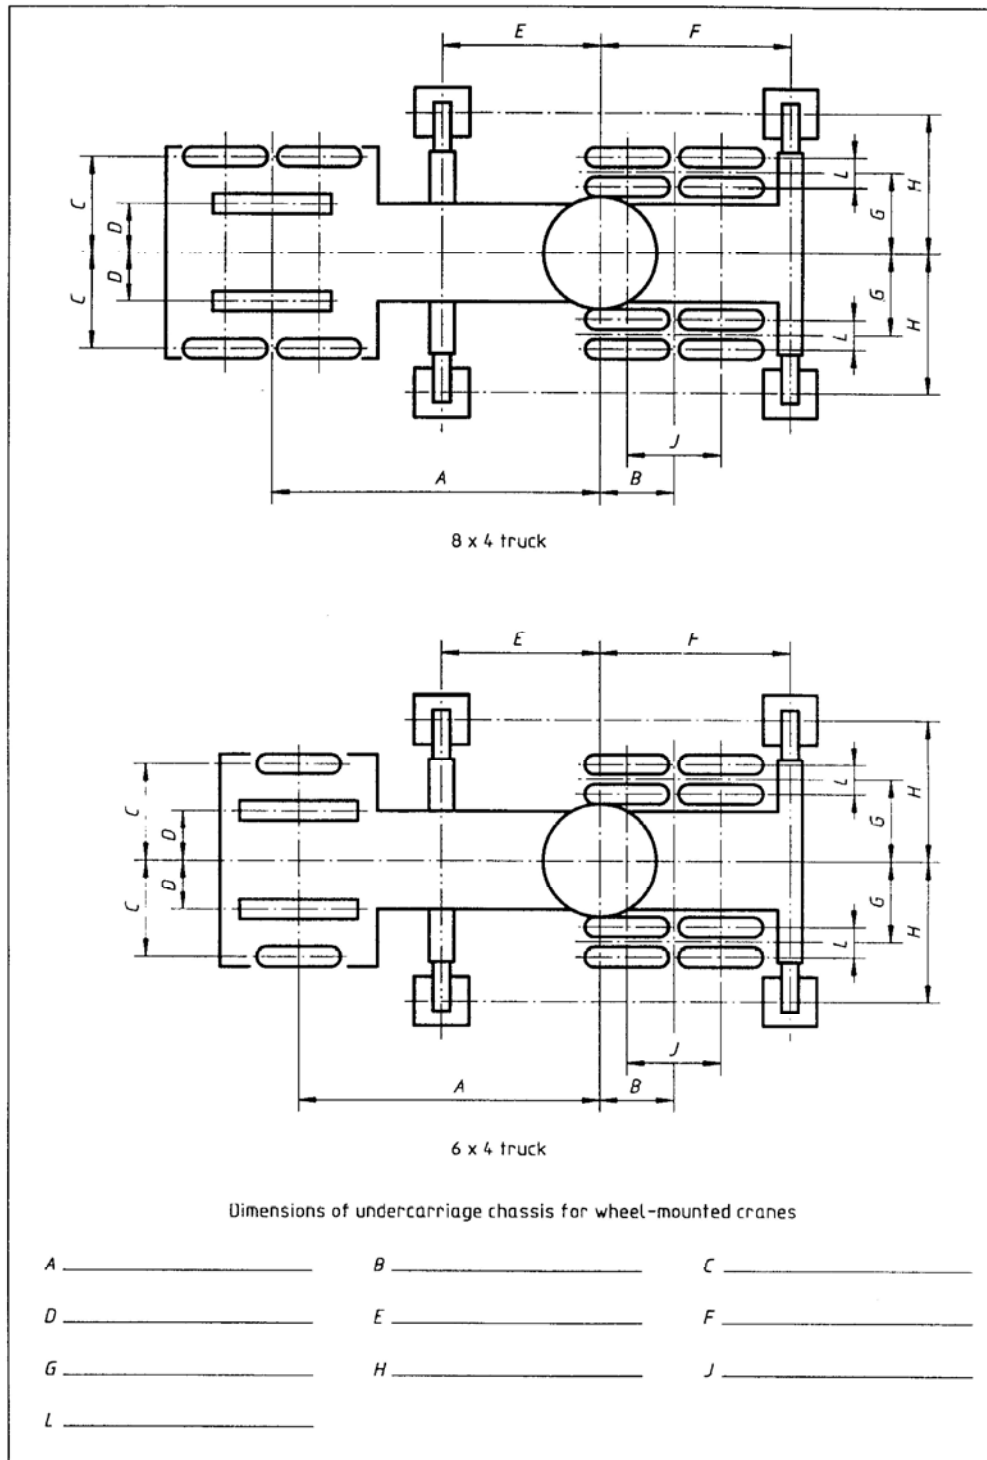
Data sheet for physical dimensions of undercarriage chassis for wheel-mounted cranes
